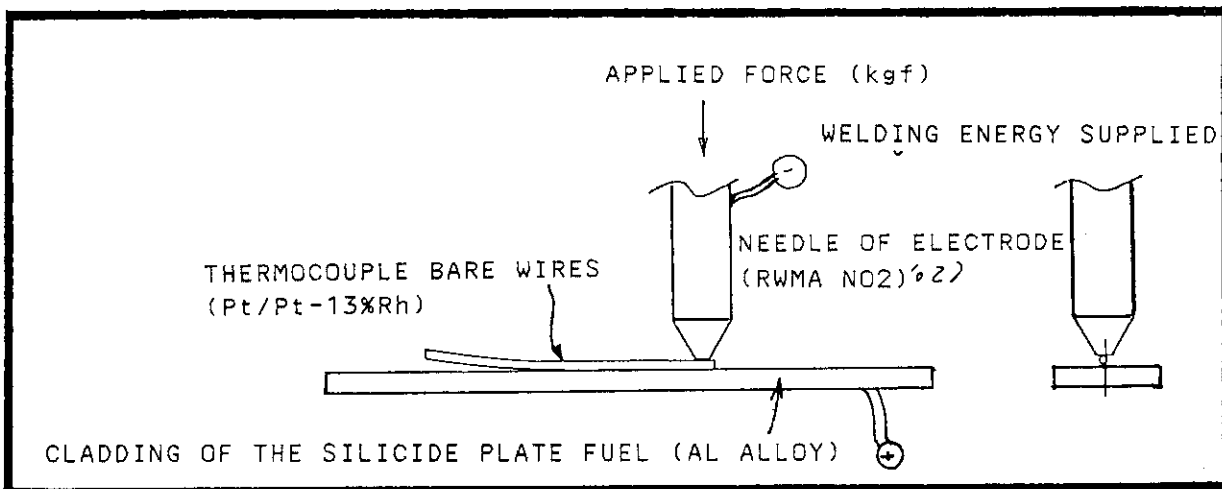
Parallel method for the welding of Pt/Pt-13%Rh bare wire.
